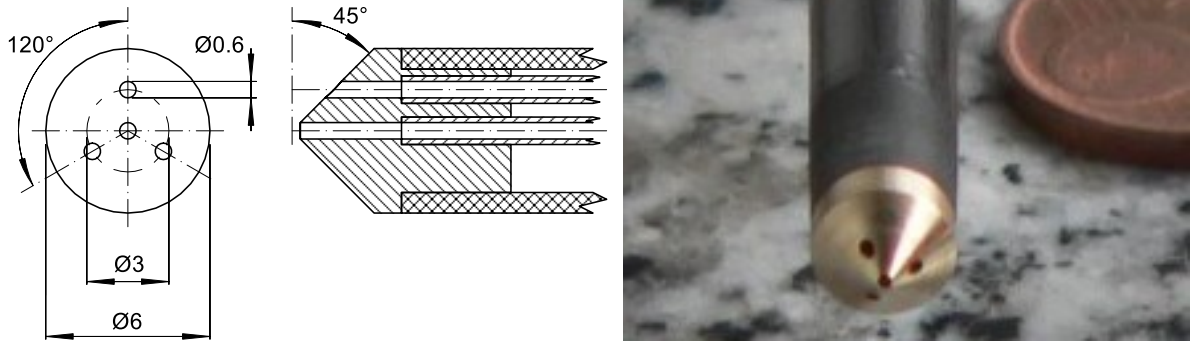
Schematic view (left) and photograph (right) of a cone-shaped four-hole pressure probe.
